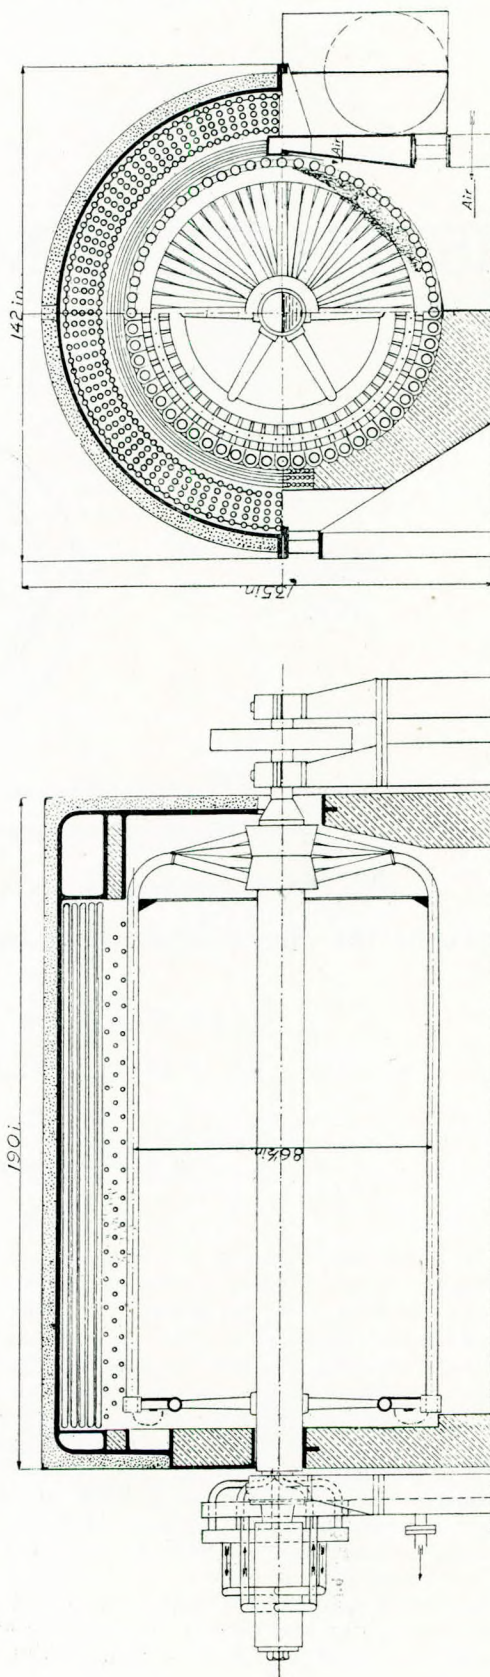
Atmos steam generator (20,000lb. of steam per hour; 1,425lb. per sq. in.; 840° F.).
